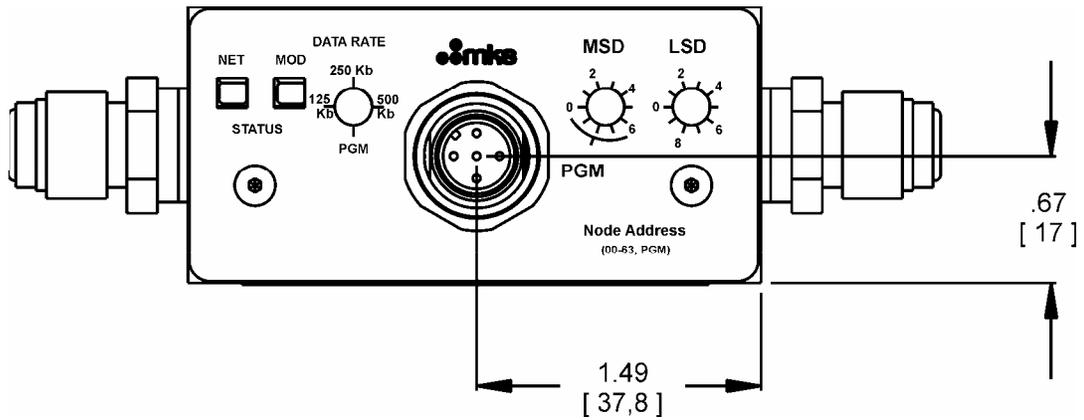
Top View of the MKS ALTA Mass Flow Devices (Welded Fittings)
